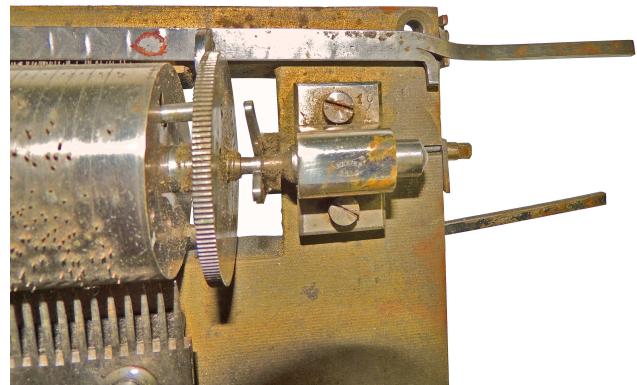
Showing the 'tailstock hollow centre' for the right hand end cylinder bearing
